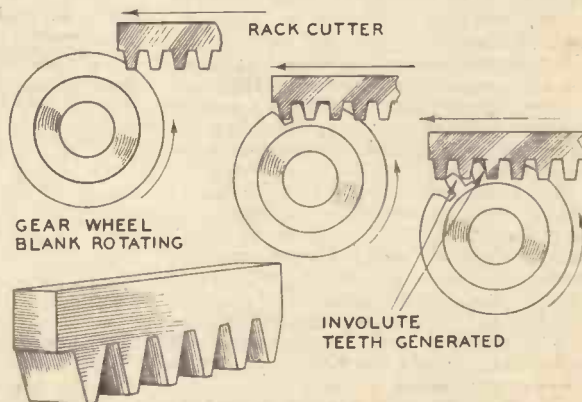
A simple cut straight-toothed rack can be made to cut correctly curved teeth in a circular blank. While the rack is moved forward into engagement with the rotating blank, it is given a simultaneous side-to-side cutting movement
